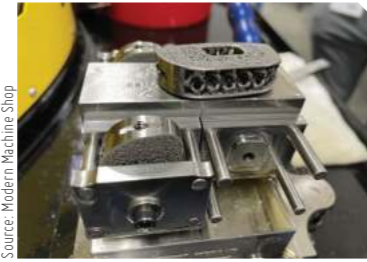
Final machining of production parts is an additional machining capability needed for metal additive manufacturing. This photo and the two preceding ones all were taken at RMS, a medical device manufacturer established in CNC machining that nevertheless decided to allocate special machining capacity to additive manufacturing.
